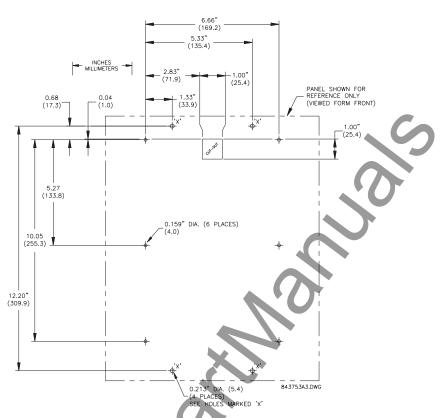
C60 VERTICAL SIDE MOUNTING REAR DIMENSIONS
